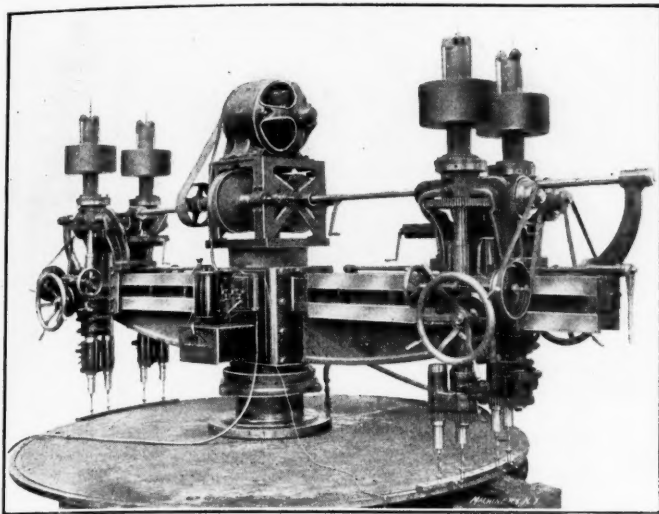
Special Double-head Radial Drill Driven by 10 H.P. Motor Working on a Turbine Disk.
